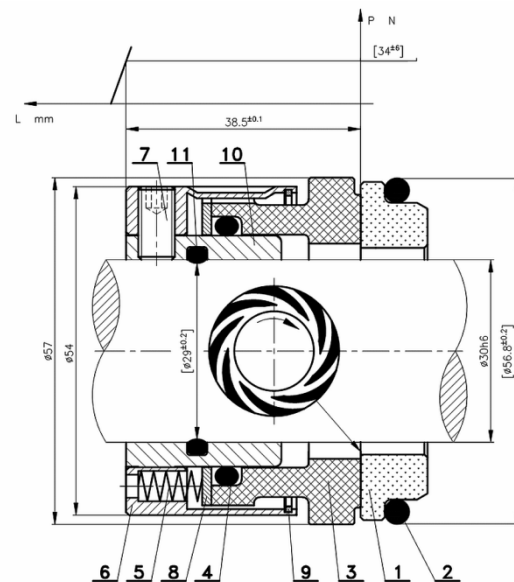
The essential parts of the tested face seal [5]: 1 – stationary ring, 2 – static O-ring, 3 – rotating ring, 4 – dynamic O-ring, 5 – springs, 6 – seal housing, 7 – set screws, 8 – thrust plate, 9 – snap spring ring, 10 – protective sleeve, 11 – static O-ring
